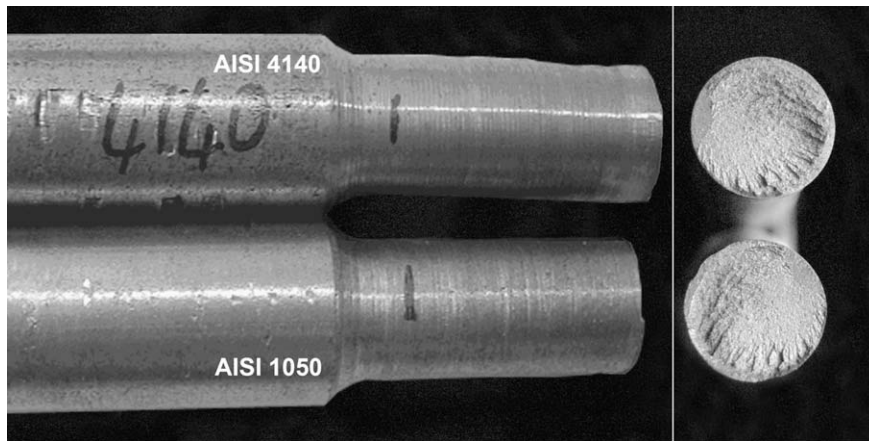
The macro photographs of the tensile tested and the brittle fracture surface of tensile tested specimen.
